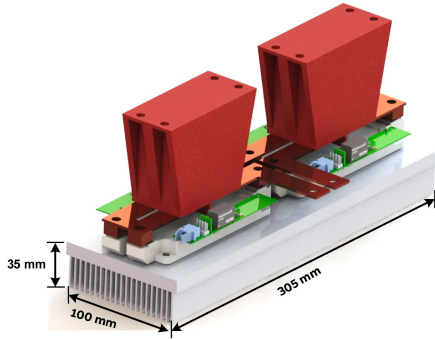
Mechanical design of 4.5 kA prototype assembly.
